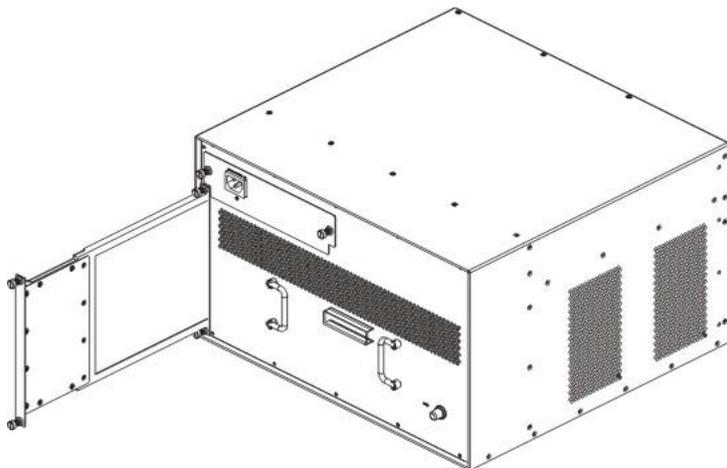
Installation and removal of the DCRS-7604 dust gauze
